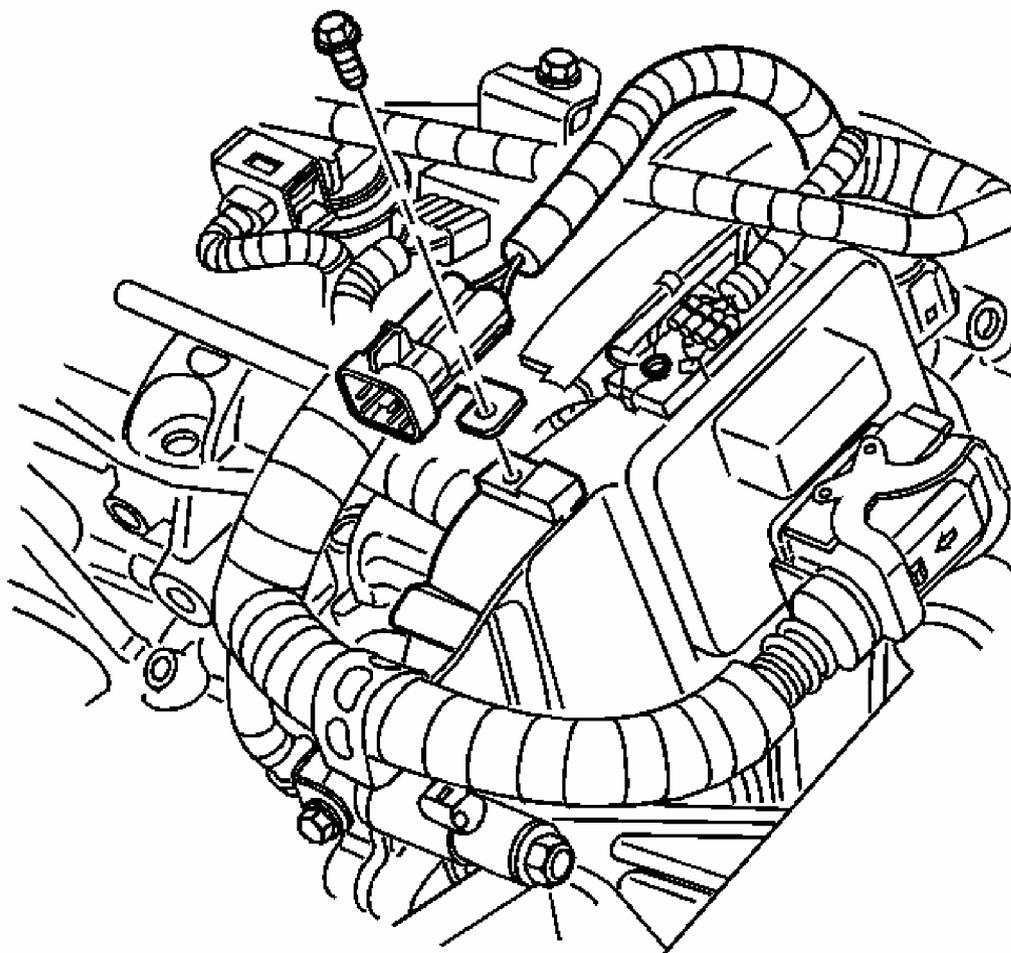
View Of Engine Wiring Harness At Left Side Of Throttle Body/Intake Manifold
